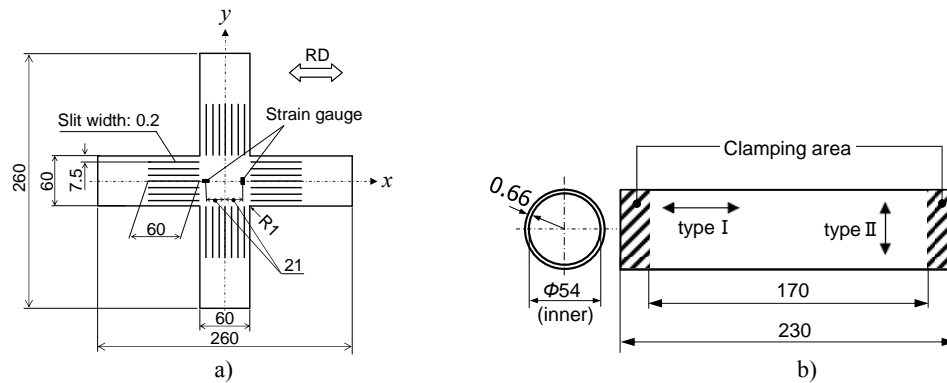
Schematic diagrams of specimens used for the biaxial tensile tests (dimensions in mm): a) cruciform specimen; b) tubular specimen. \leftrightarrow indicates the RD of the as-received sheet sample.
